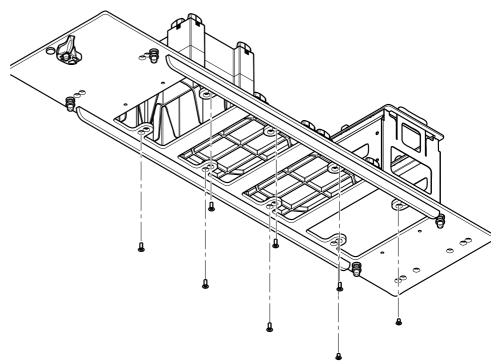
Assembling a customized segment (example), view from below the carrier
